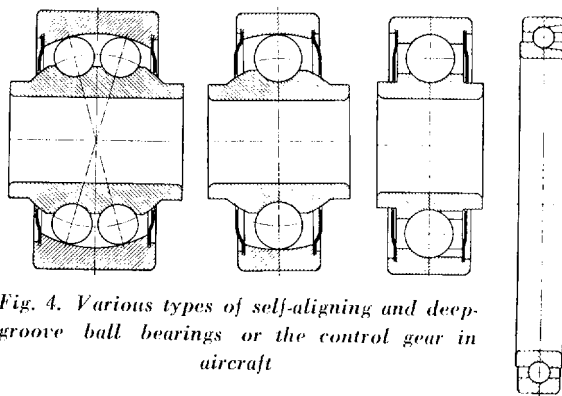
Various types of self-aligning and deep-groove ball bearings or the control gear in aircraft
